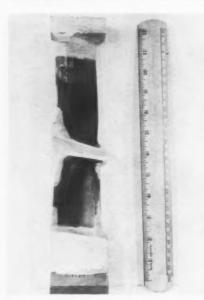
Certain areas of part are given a prime coat to insure good bond of plastisol.
